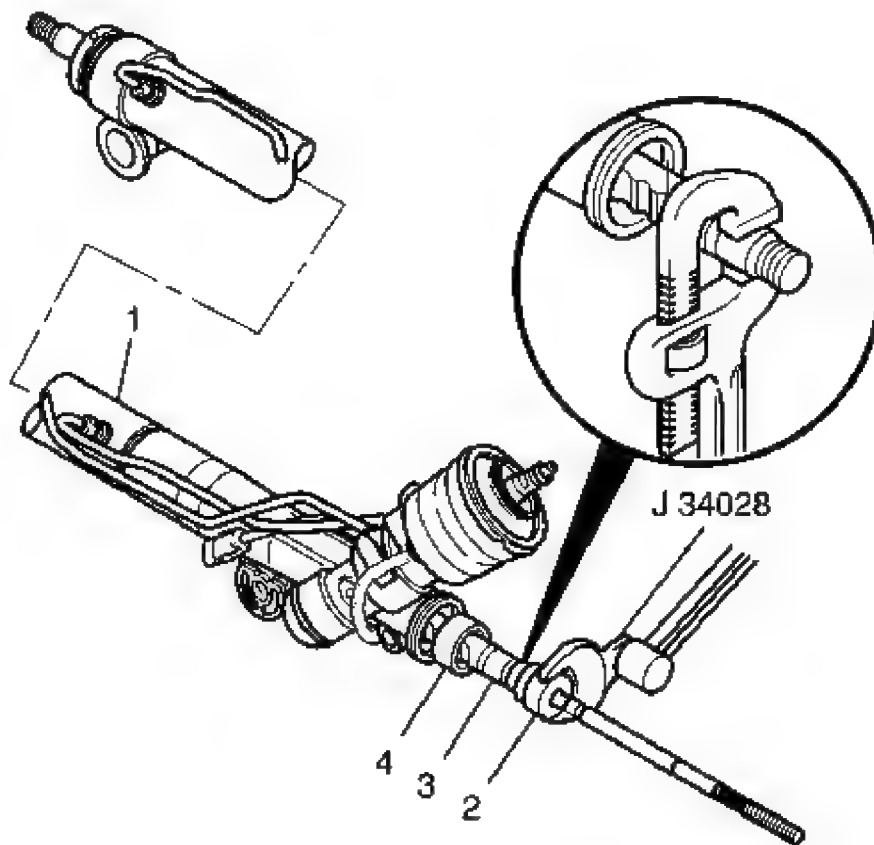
View of Shock Dampener, Rack, Female/Male Inner Tie Rod with J 34028
